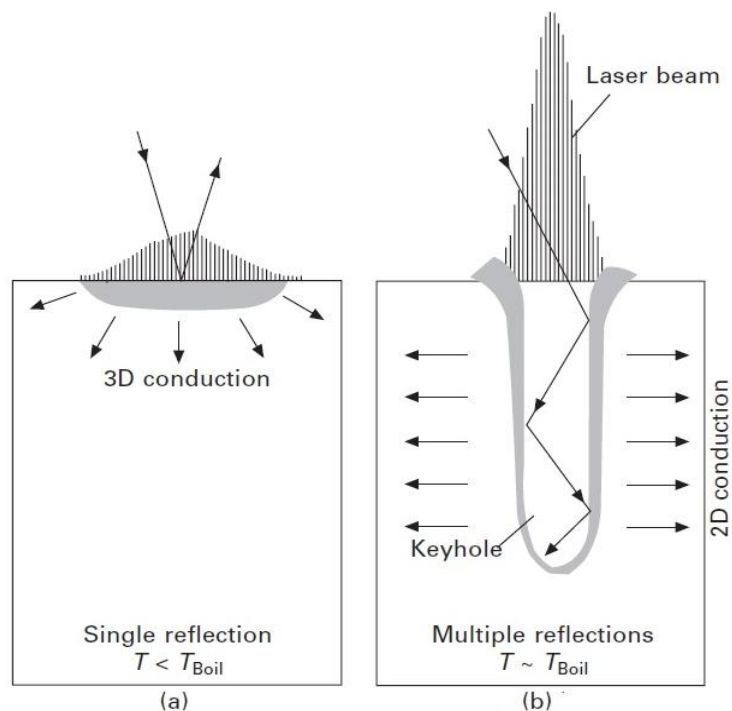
Scheme of laser welding operating modes, adapted from [36].
